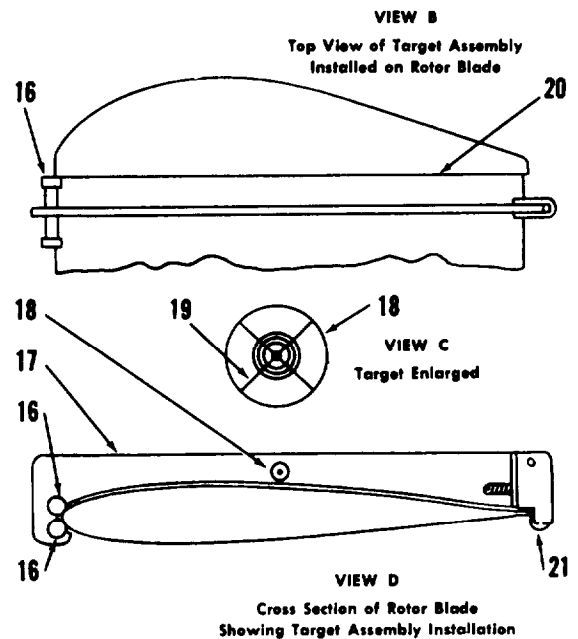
Setup for Optical Trammeling of CH-37 Helicopter Tail Rotor Assembly (Sheet 2 of 2).
